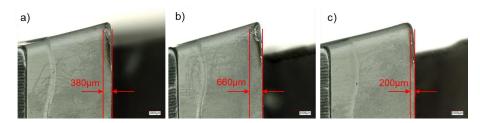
Shape milling greatest tool wear on the indexable insert experiment No. a) 1-1 b) 2-1 c) 3-1
